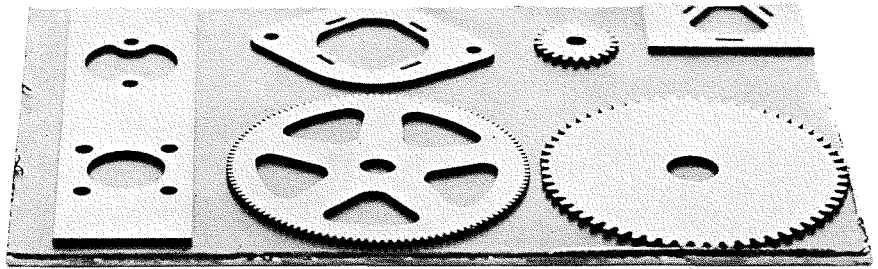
These parts were formed in a photopolymer material by making a contact print using UV light and removing the unexposed material.
